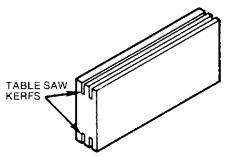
You can prepare a workpiece for resawing by making table saw cuts. The kerfs help to guide the blade and they reduce the amount of material on which the blade must work.
